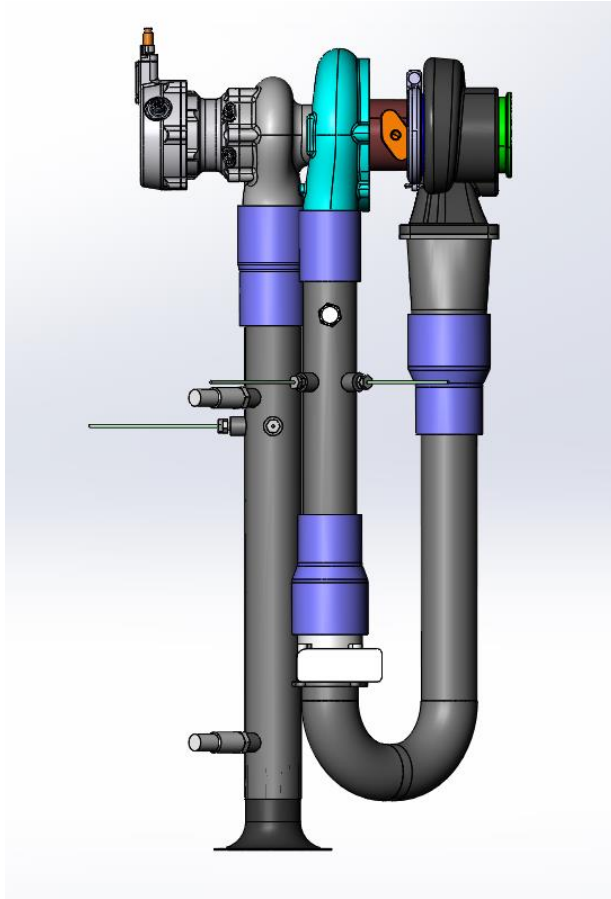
Top view of the test setup design with the EM65 electric motor
